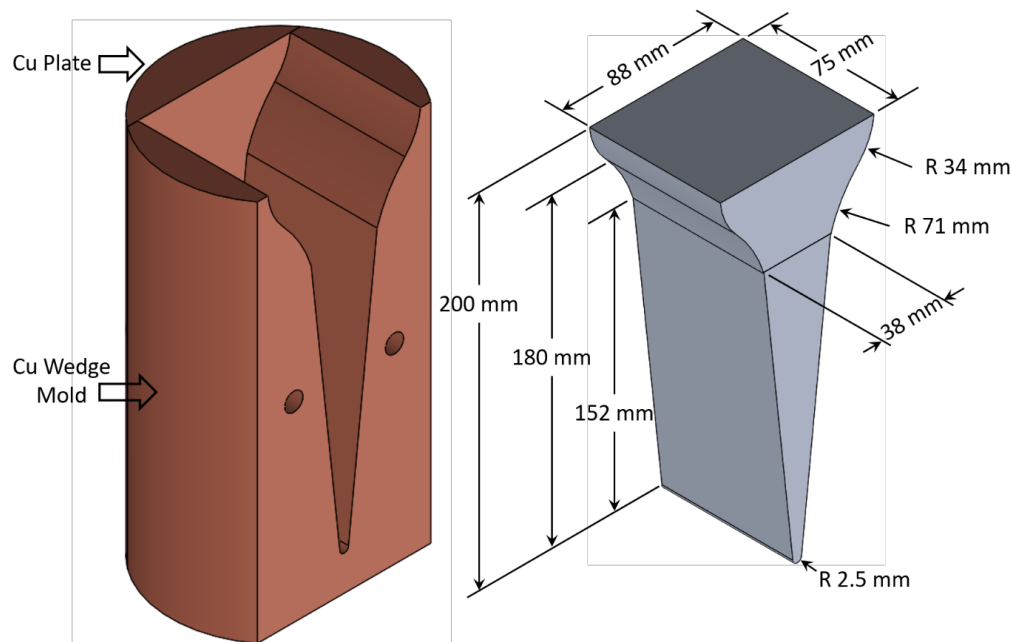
Drawing of the Cu wedge mold and resulting wedge geometry. The wedge has an approximate volume of 425 cm³.
